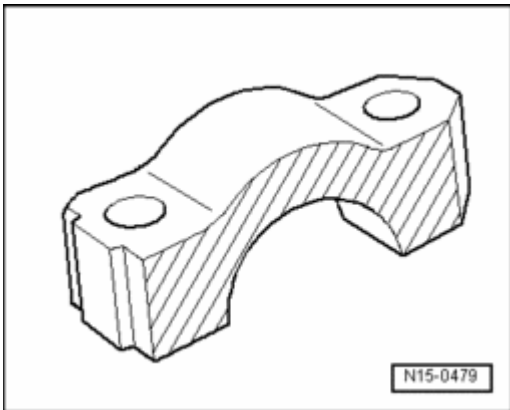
Coating Face Surface Of Bearing Cap For Axial Bearing With Adhesive Lubricating Paste
